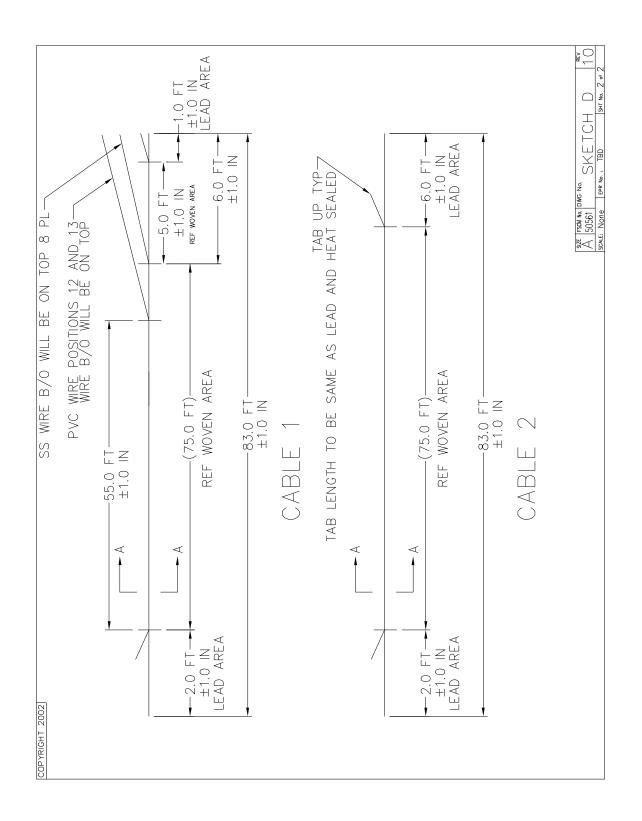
Technical drawing of control cable manufactured by Woven Electronics.
